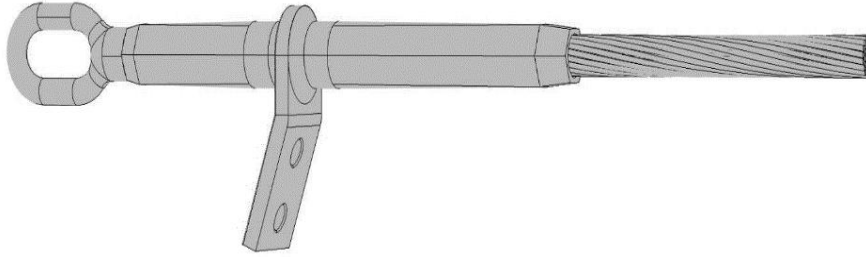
A view of dead-end clamp assembled on the lynx conductor.
